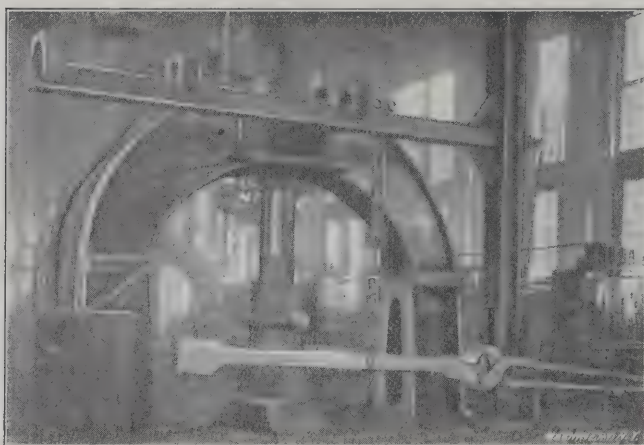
Finishing the Main Rod Forging under the Steam Hammer
